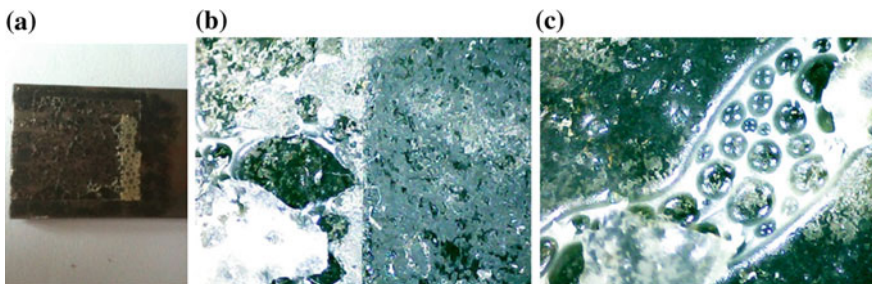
Component of the assembly without surface treatment after shearing: a general view; b, c microscope image,  $\times 80$
